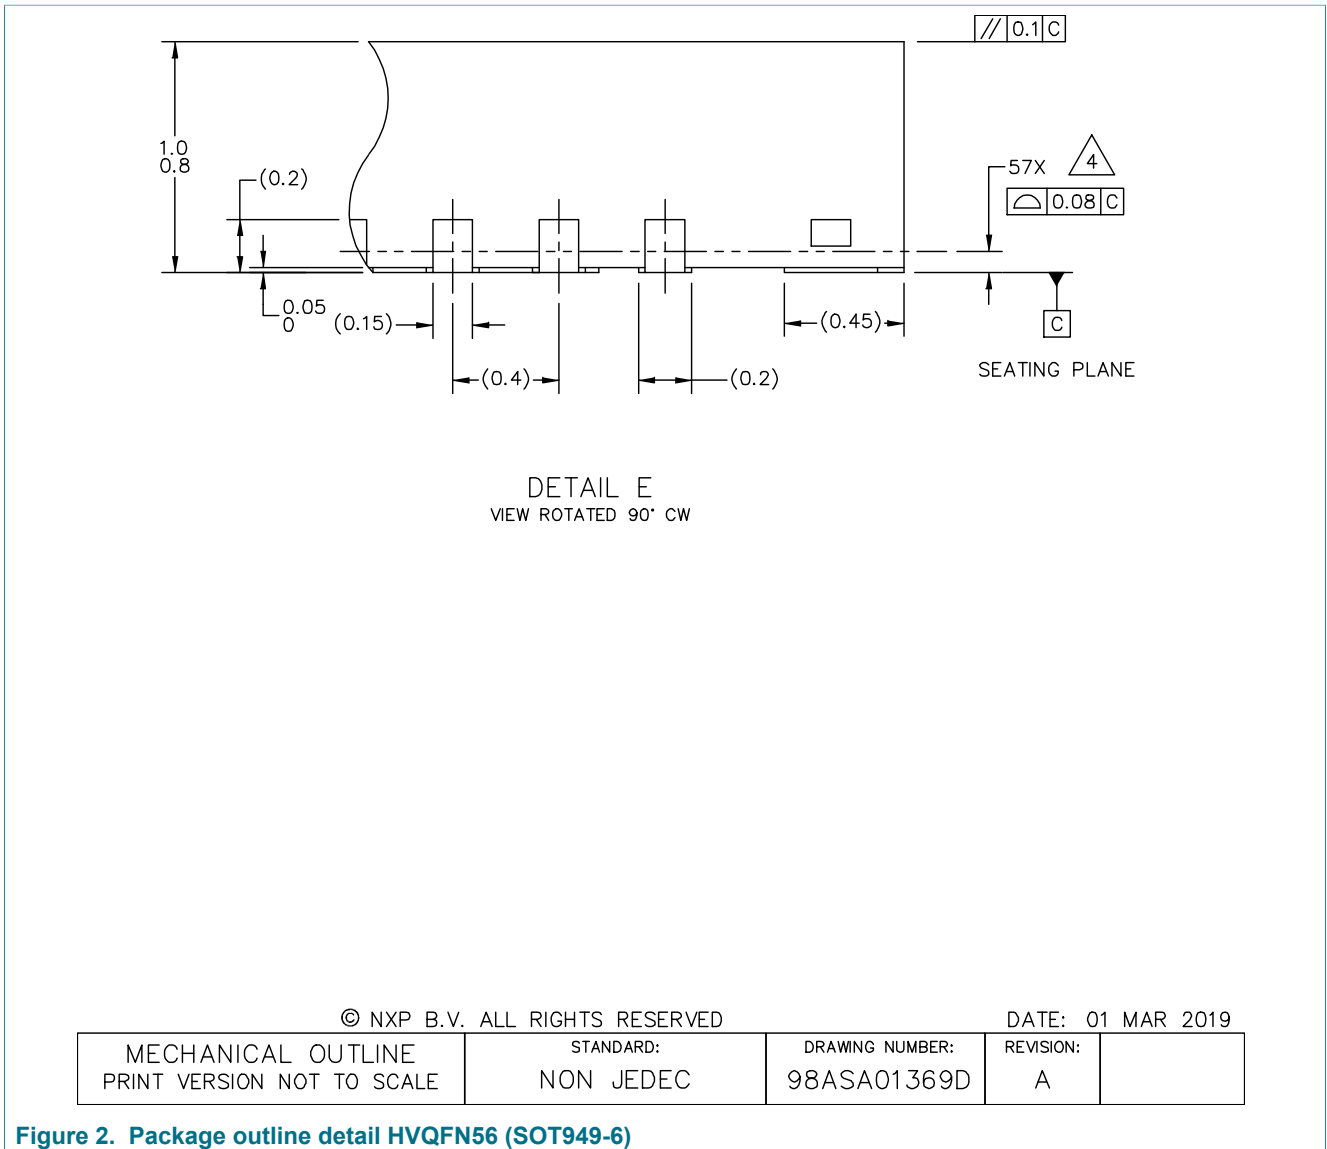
Package outline detail HVQFN56 (SOT949-6)
